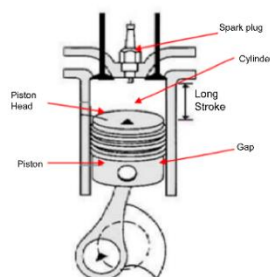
The gap between the cylinder piston and the combustion chamber.
